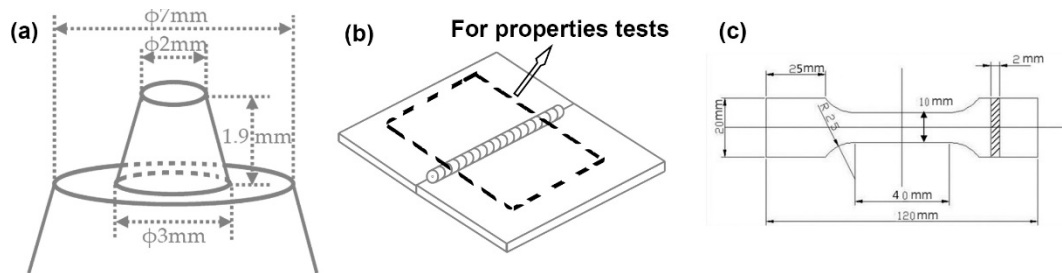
Schematic illustration of (a) dimensions of the FSW (Friction Stir Welding) tool and (b) samples extraction from the plate for properties tests, and (c) corresponding dimensions.
